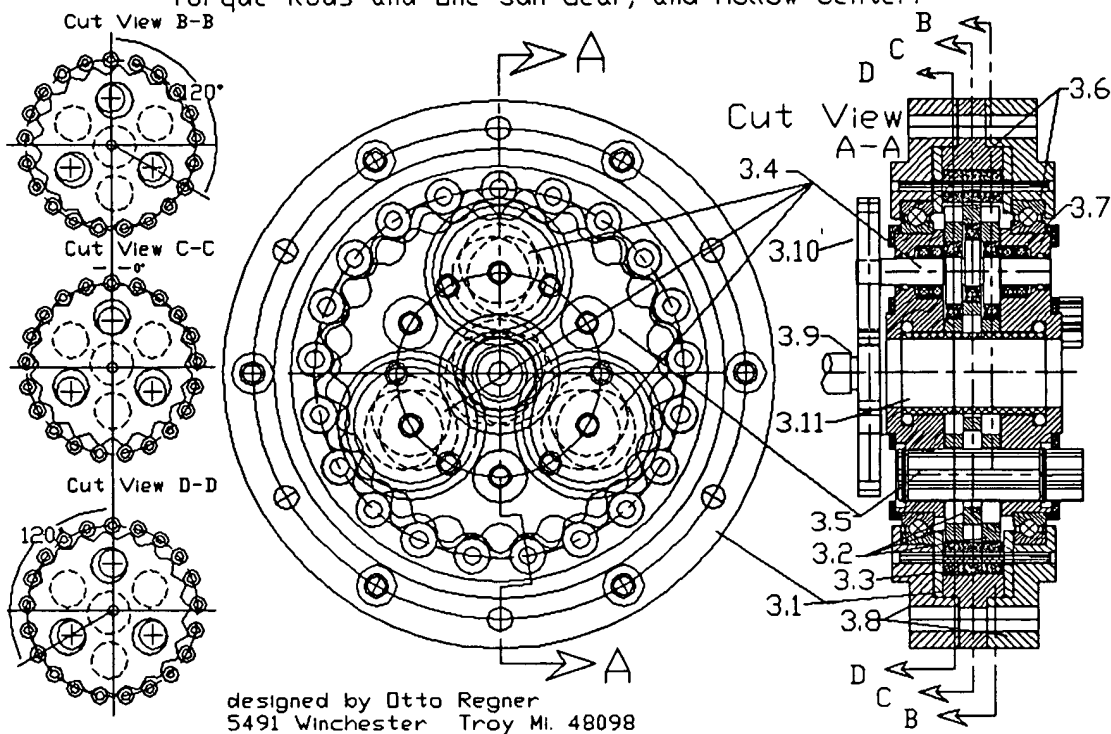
Heavy-Duty Precision Cyclo Gear System with Three Camshafts, Three Torque Rods, Three Disks, Three Planet Gears, One Center or One Outer-Centered Peripheral Sun Gear, and Hollow Center Hole
